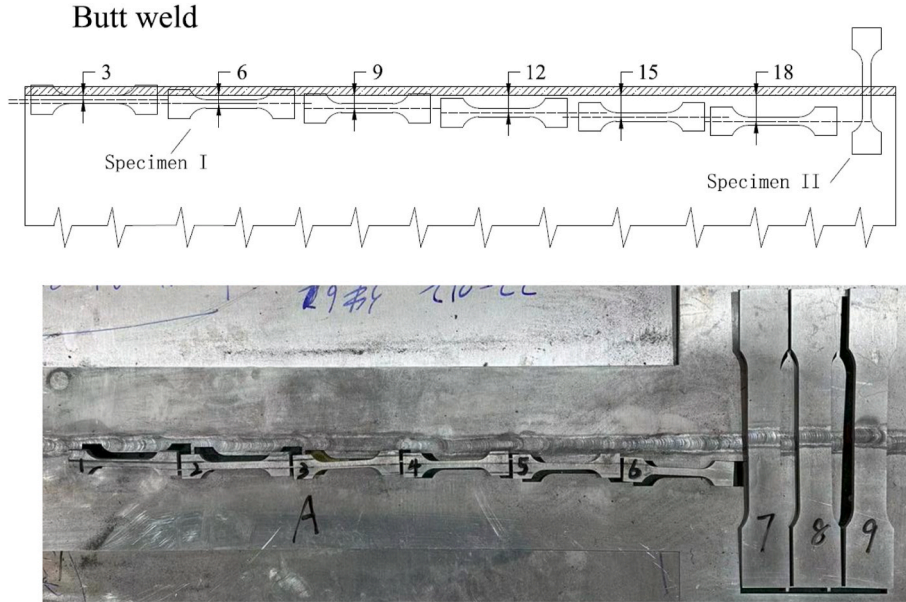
Arrangement of specimens cut from the butt weld.
